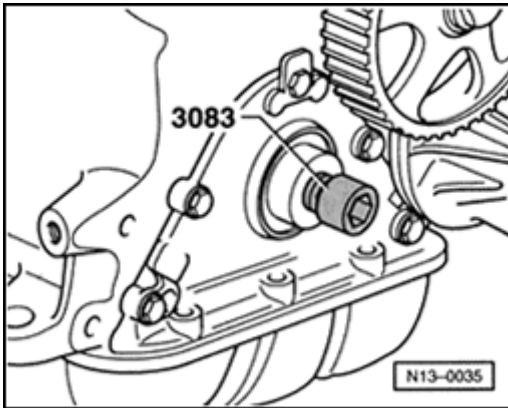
Screwing Phillips-Head Bolt From 3083 Into Crankshaft
